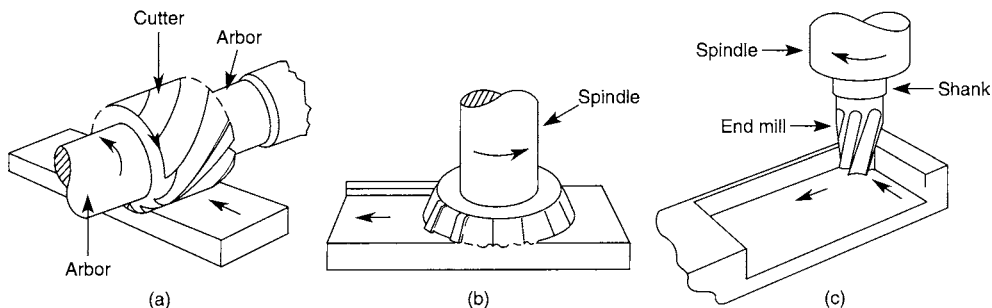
Basic types of milling cutters and operations. (a) Peripheral milling; (b) face milling; (c) end milling.
